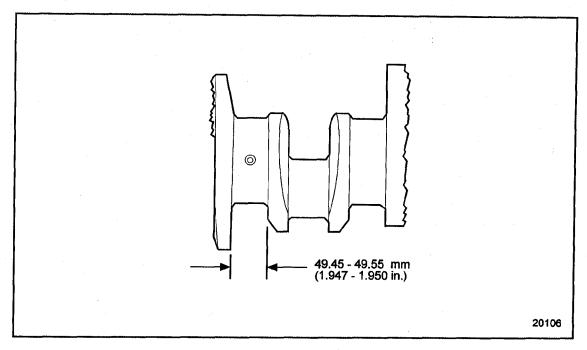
Dimensions for No. 6 Main Bearing Journal Thrust Width
